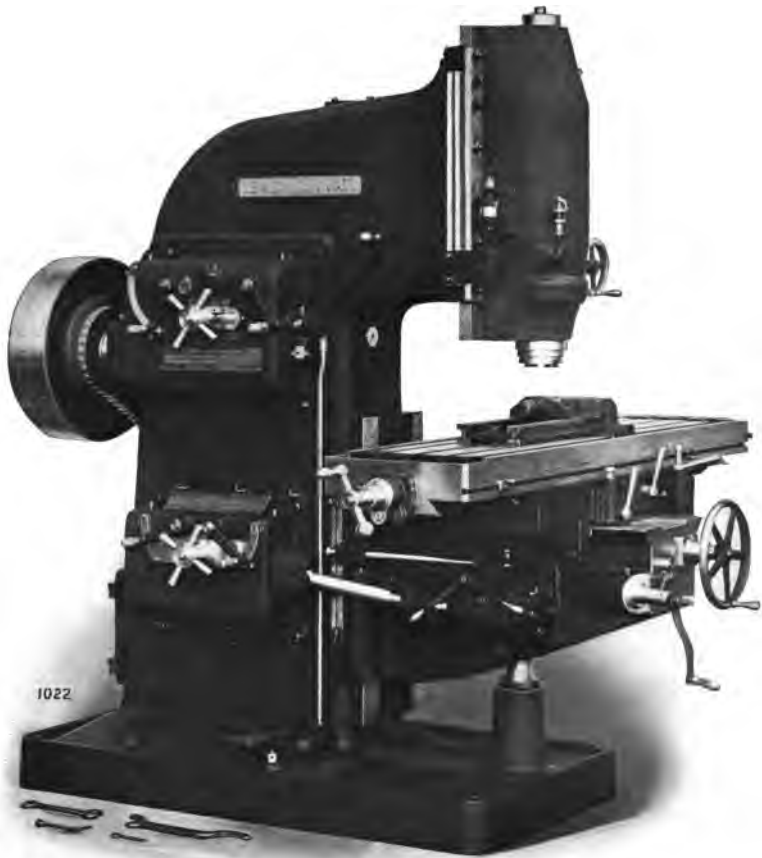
The Constant Speed Belted Motor Drive Arrangement
